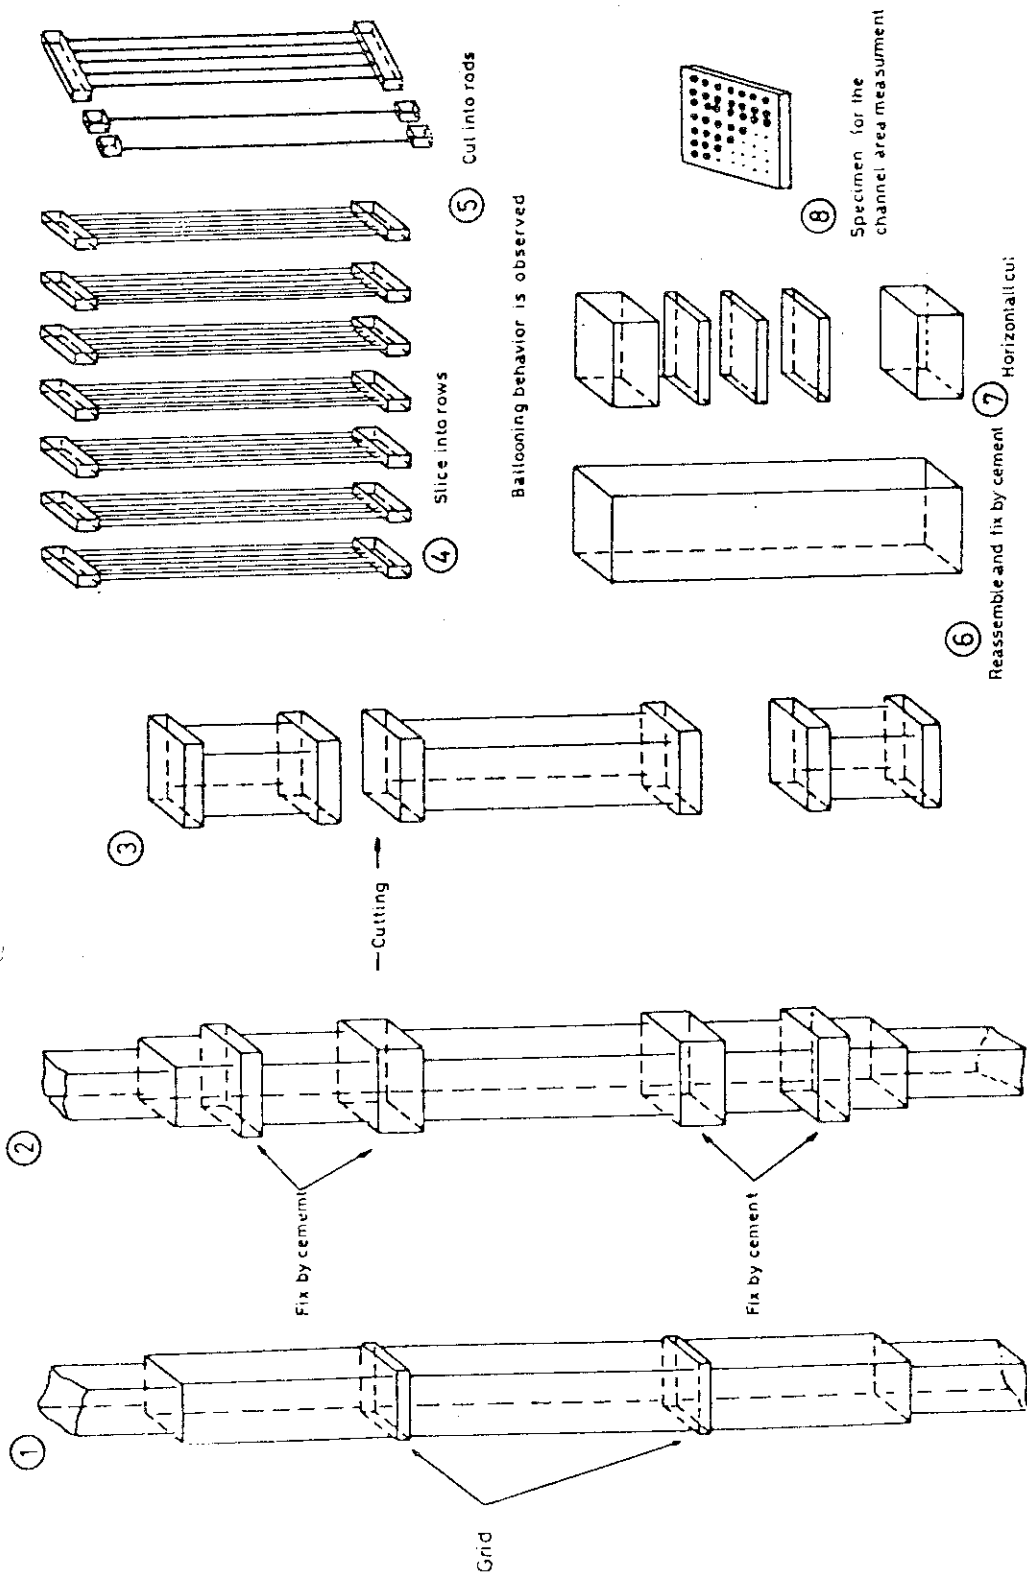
SEQUENCE OF THE POST BURST EXAMINATION OF A ASSEMBLY.
